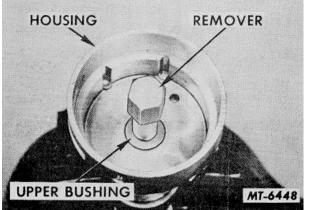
Bushing Remover SE-1955-5 Installed in Upper Bushing
